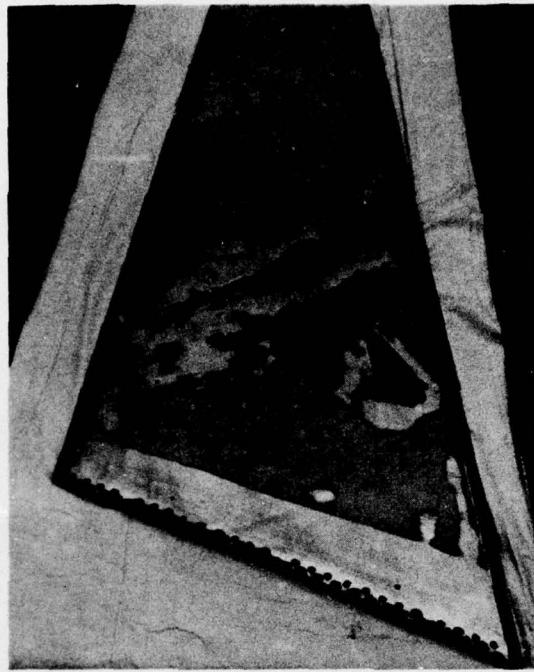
Cosmetically Filled Fin Panel to be Used as Base for Molding the Fiberglass Bond Assembly Jig
